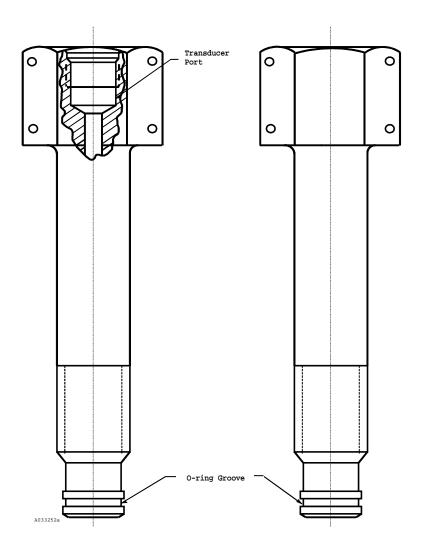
Special Bolt With Transducer Port and Solid Special Bolt
